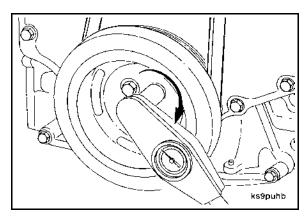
TIGHTEN THE DAMPER CAPSCREWS
